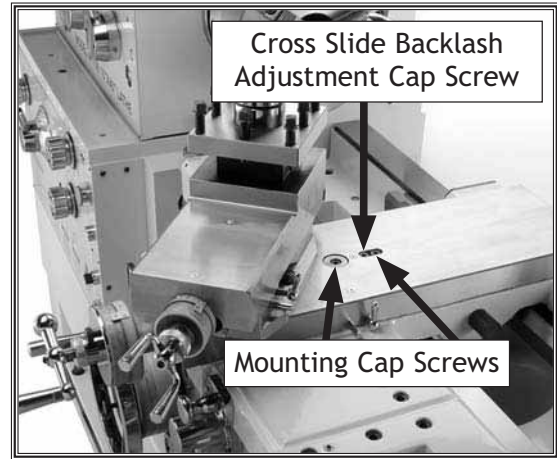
Cross Slide backlash adjustment socket head cap screw.
